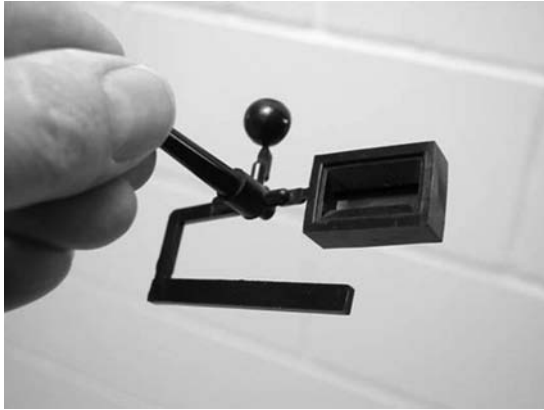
Injection molded test specimens out of thermoplastics for sphere-on-prism tests.
